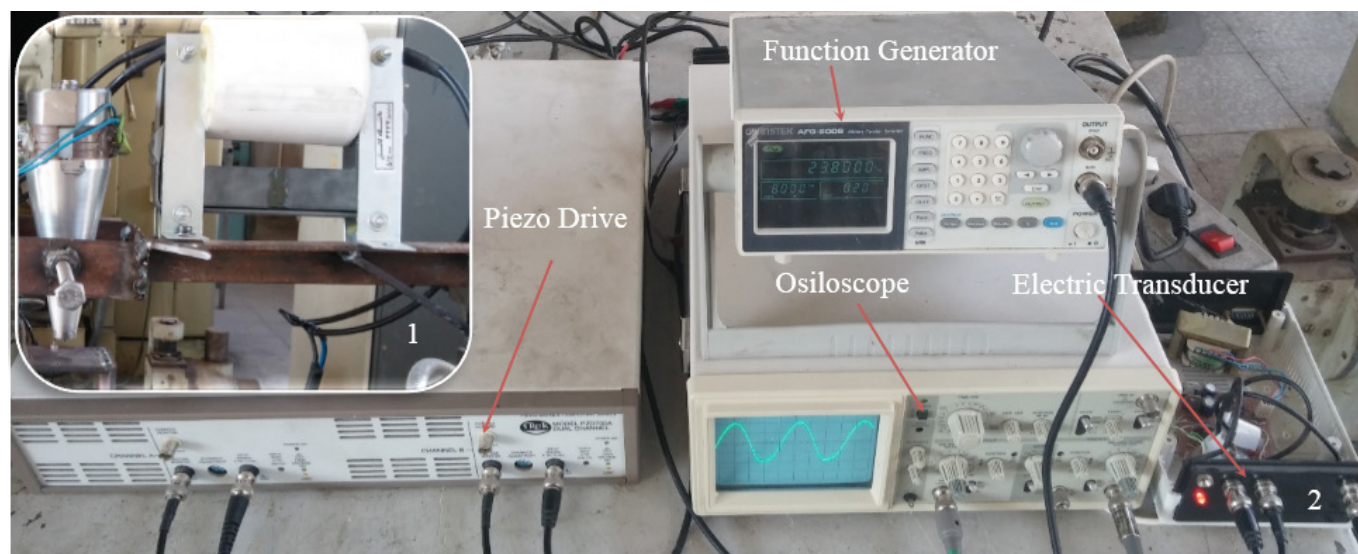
Measurement equipment of vibration amplitude of UaFSW tool tip, 1- Placement of tool set in its fixture on proximity sensor, 2- Function generator, Oscilloscope, and Piezo drive
